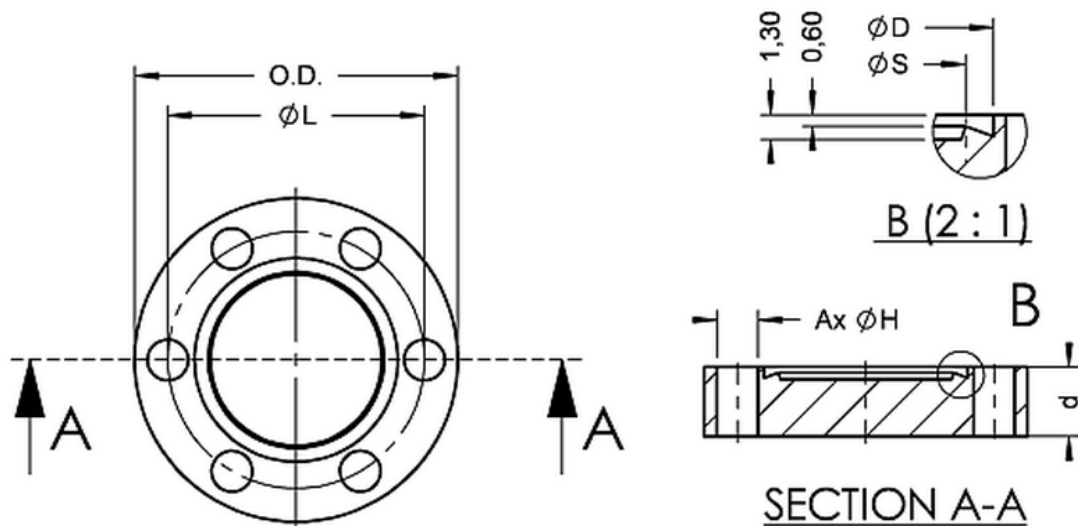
Flange CAD drawings with knife edge at top right corner.
